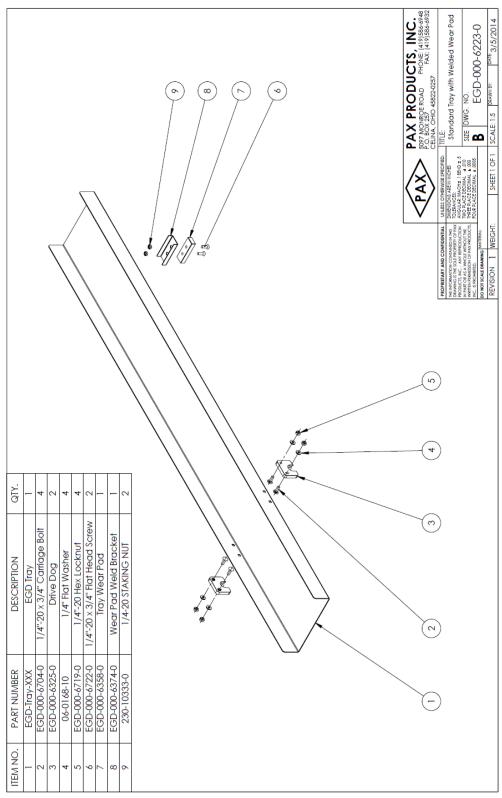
EGD-000-6223-0 STANDARD TRAY WITH WELDED WEAR PAD
